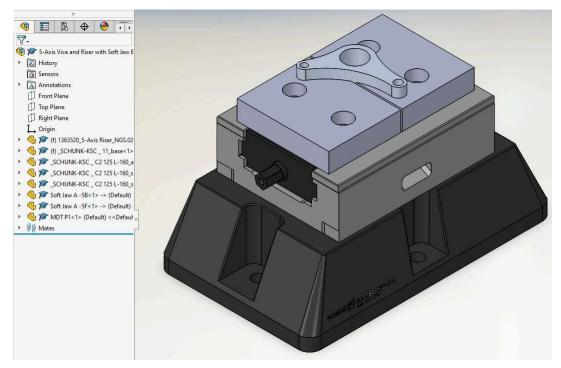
SolidWorks Assembly of Vice and Riser with P1 Mounted into Soft Jaws
